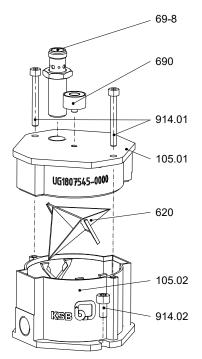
General assembly drawing of the KSB Leakage Sensor
